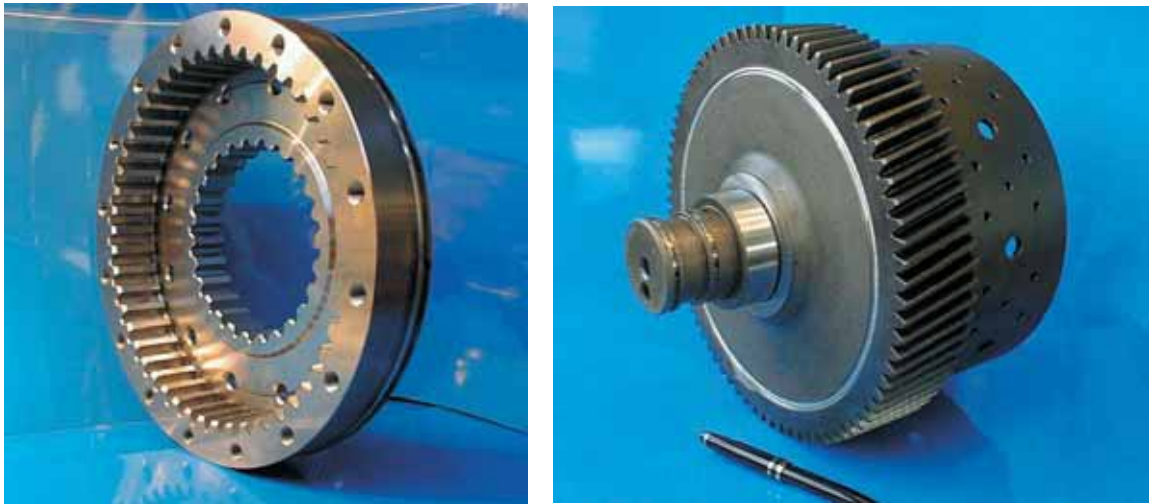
, 118: Gears with radial and axial EB welds.
